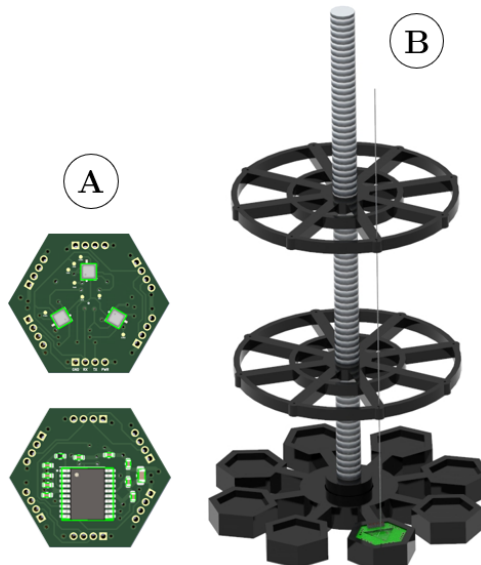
A: Whisker base PCB with three integrated barometers (top) and STM32 micro-controllers (bottom) [13]. —B: Manufacturing and curing stand.
